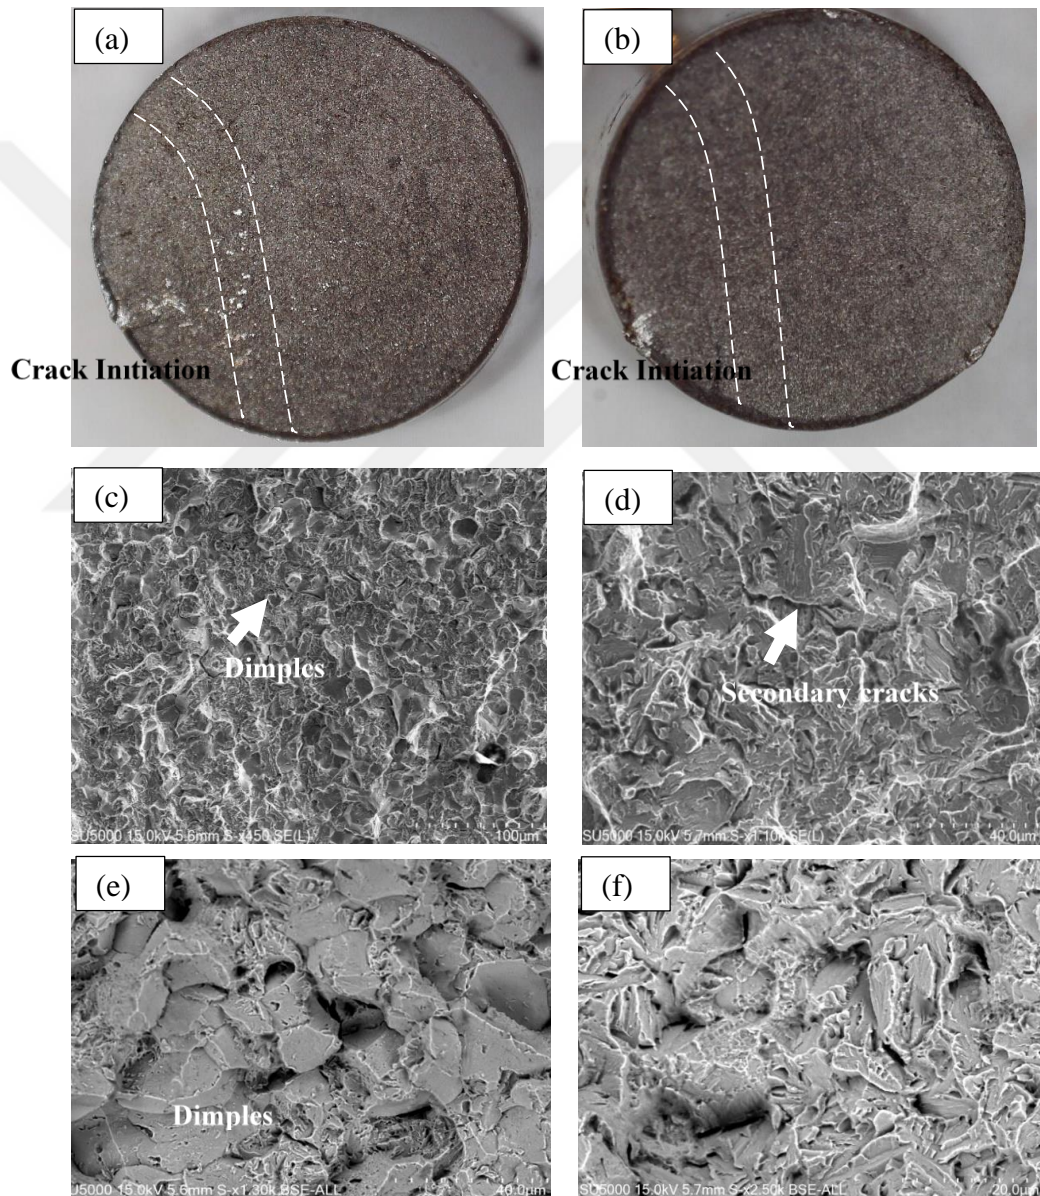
(a-c-e) Macro and microfracture surfaces of QBT200 sample after fatigue test , (b-d-f) Macro and microfracture surfaces of DIT280 sample after fatigue test.
